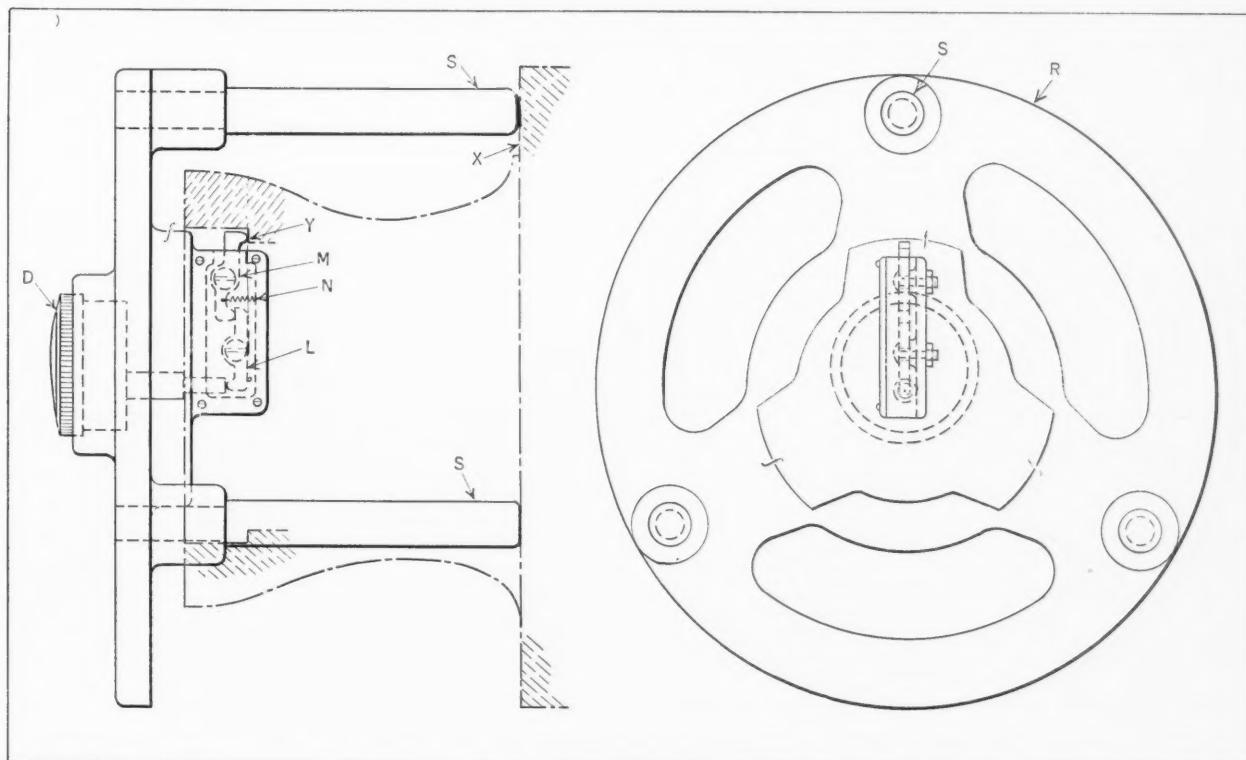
Gage for Testing Depth of Ball-race Shoulder from Flange
